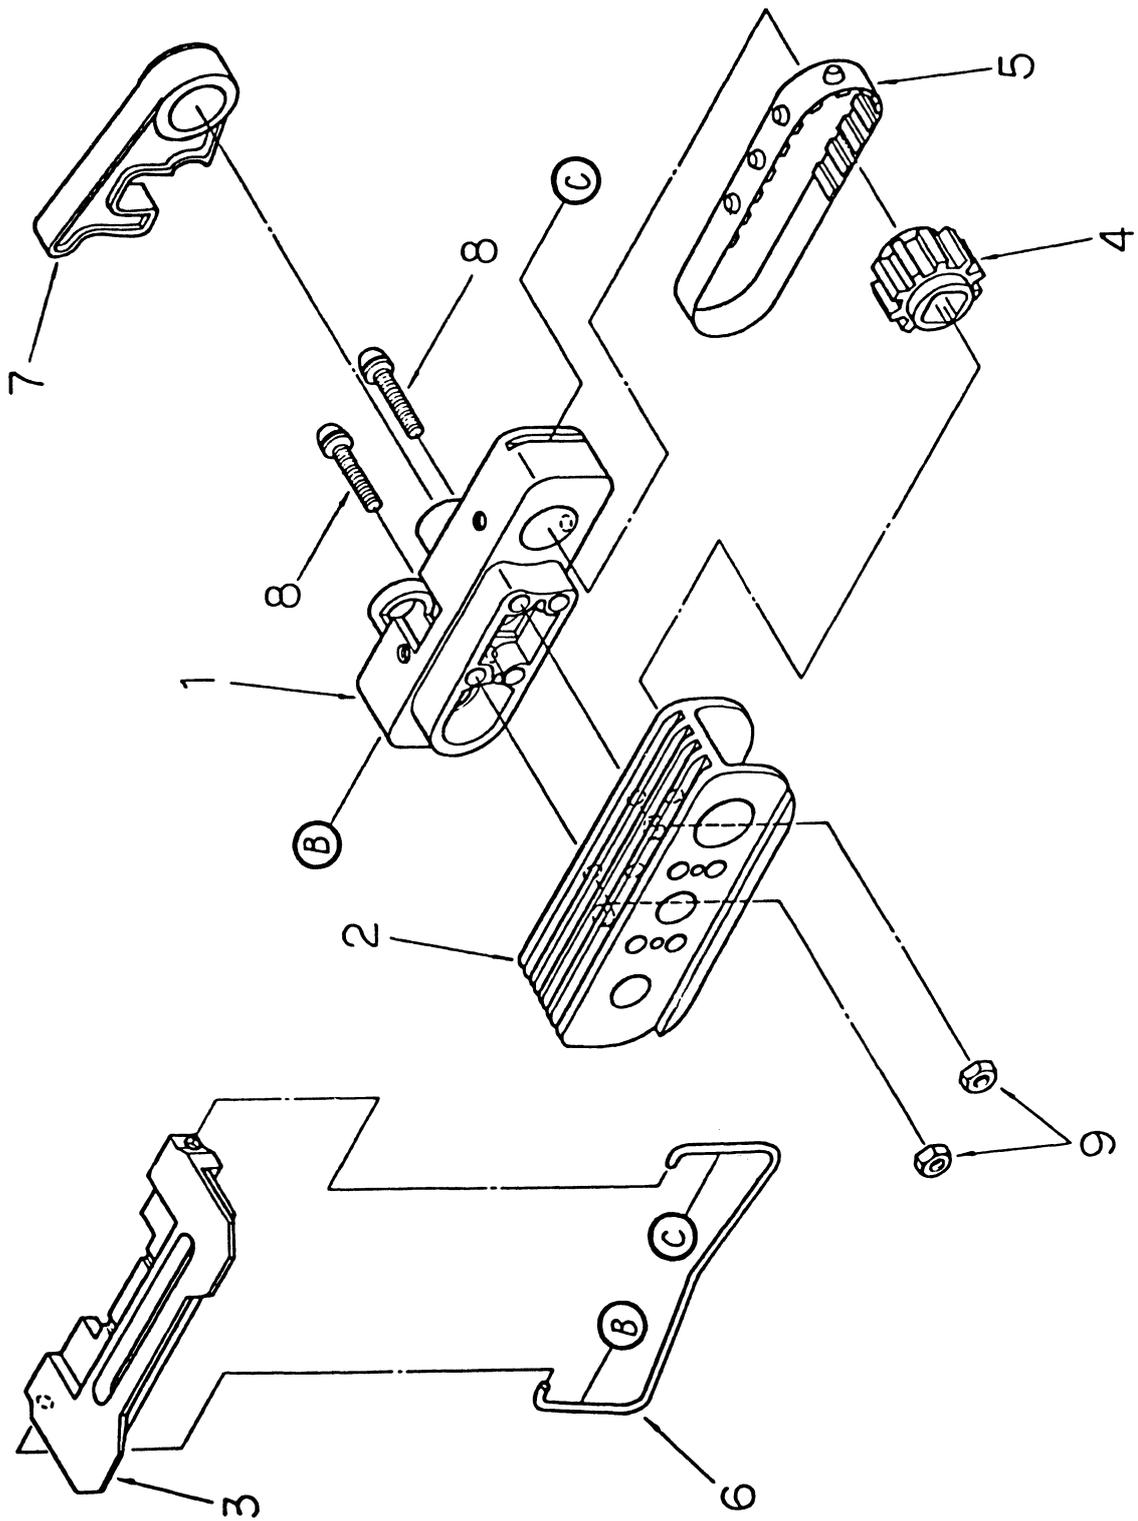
Sprocket Assembly (R) (FMX-35100-2)
